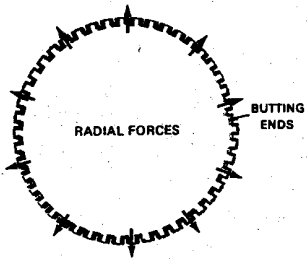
Oil ring expander-spacer that gives a radial force to the oil ring as it is compressed with the ends butting together.
